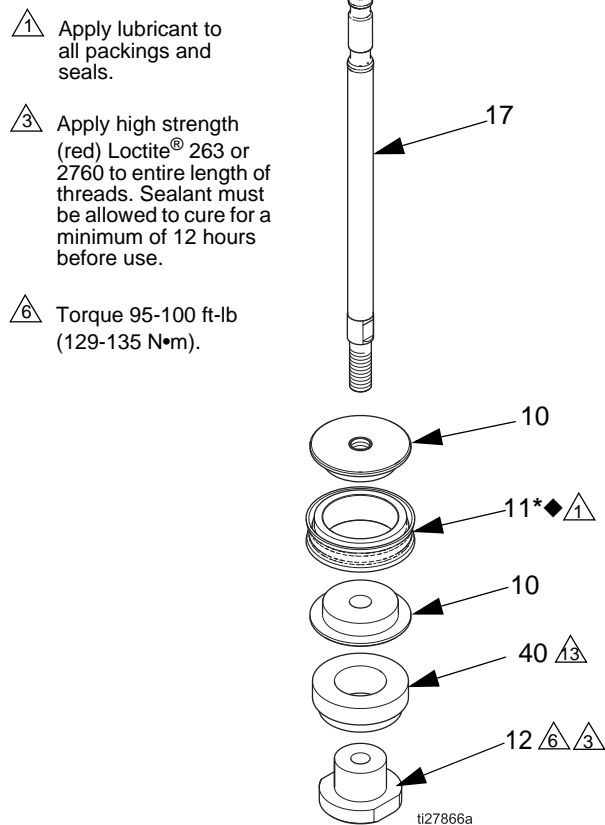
Disassemble or Assemble the Piston (1000cc, 1500cc, and 2000cc models only)
